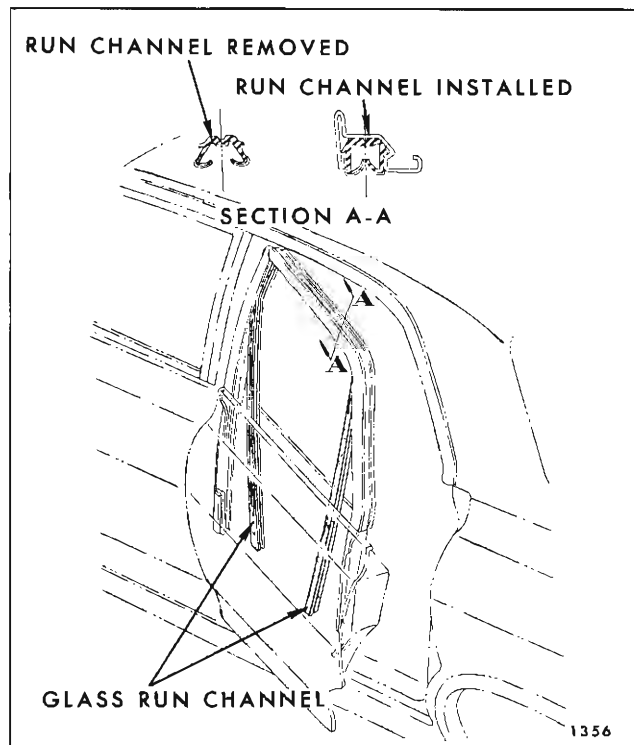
D42—"69" Style Rear Door Window Glass Run Channel Assembly
